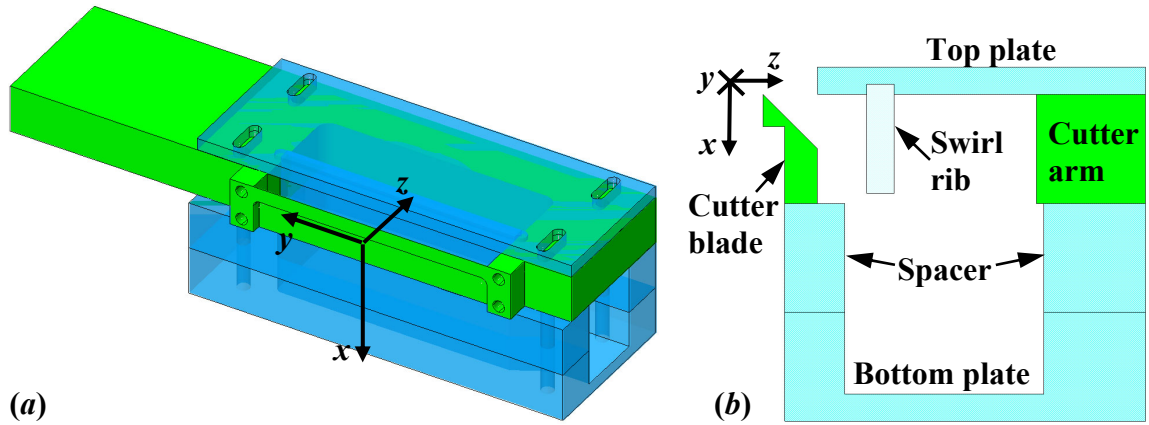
BL cutter assembly shown in (a) isometric and (b) cross-section.
